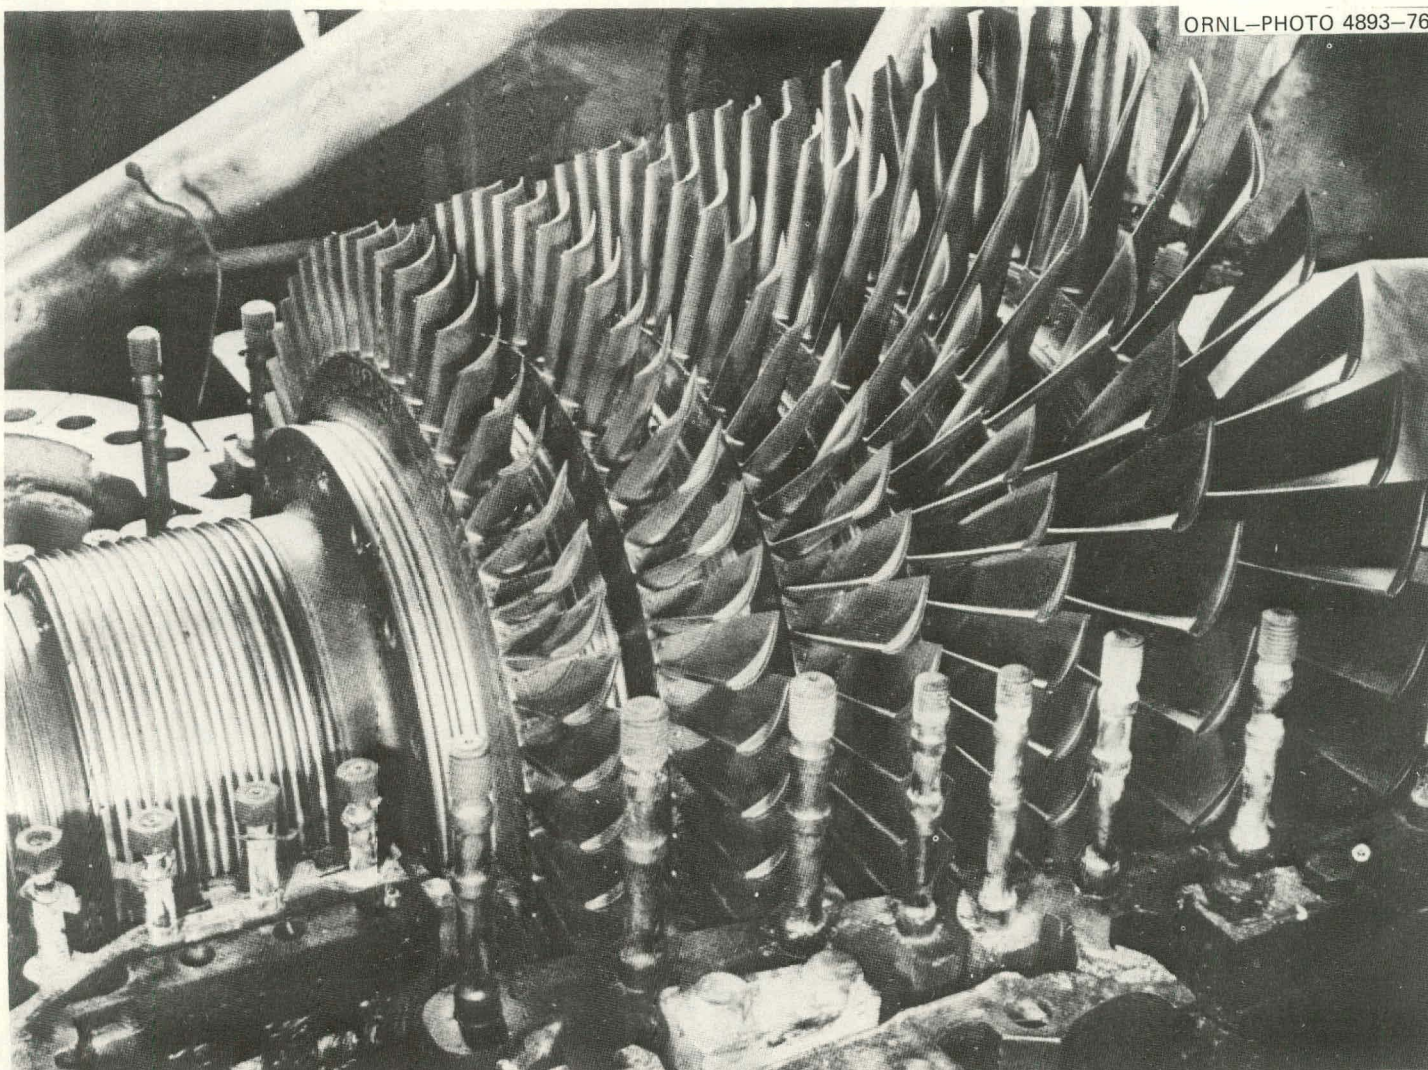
General view of locomotive turbine rotor, right side (Ref. 18).
